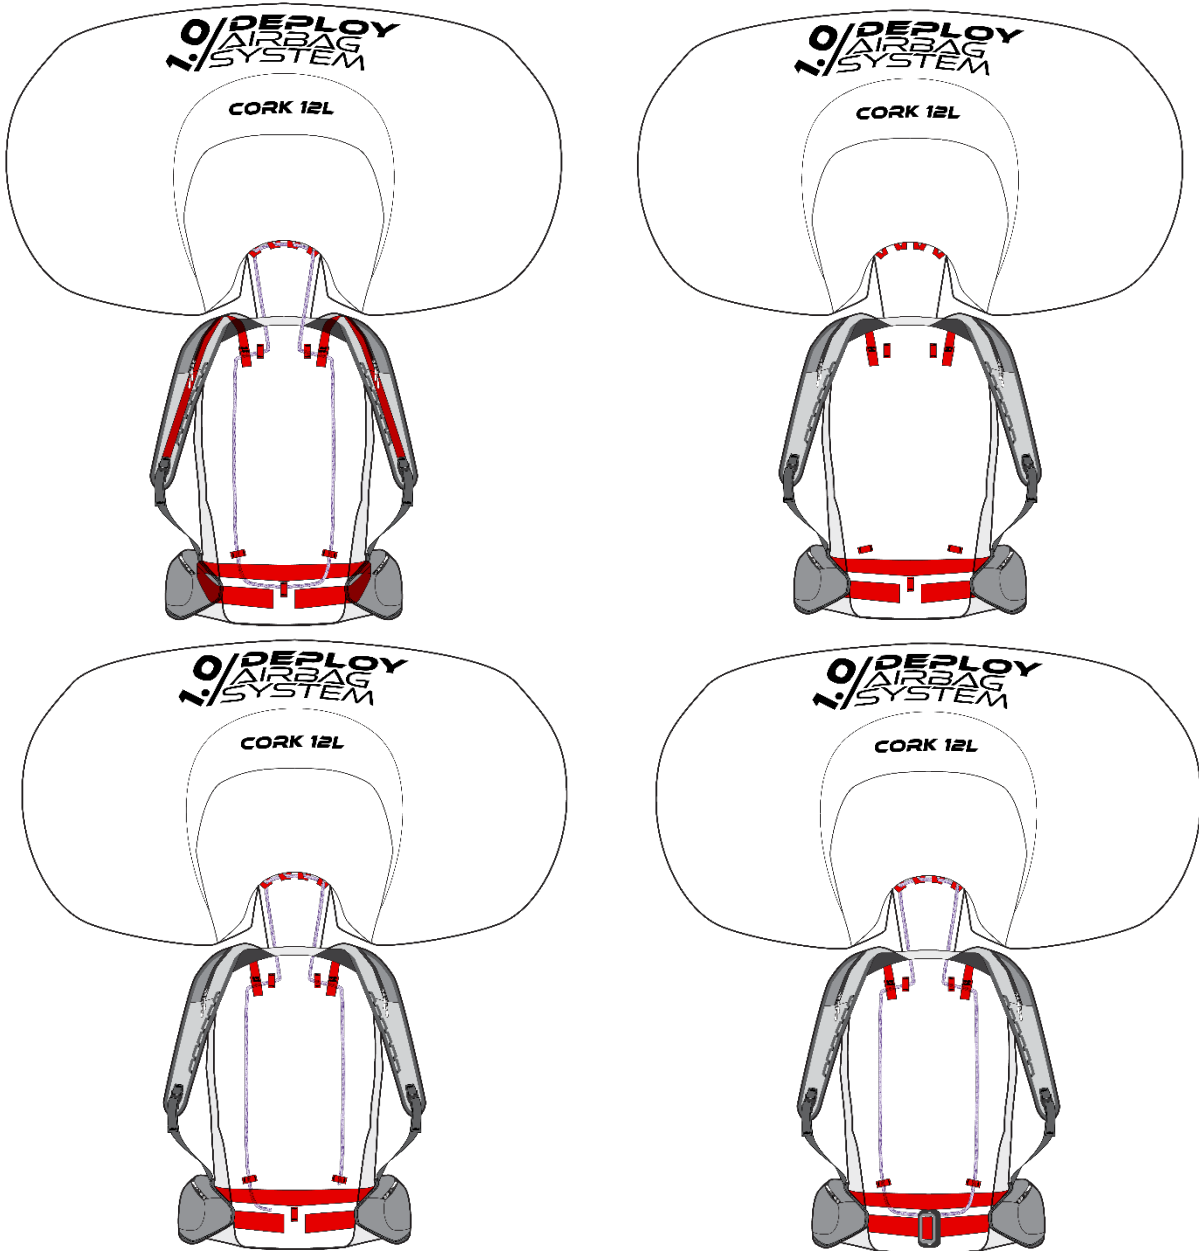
Deploy 1.0 Airbag System Threading Process (Top Left: Ghosted View, Top Right No Rope View, Bottom Left Partially Threaded View, Bottom Right Fully Threaded View)
